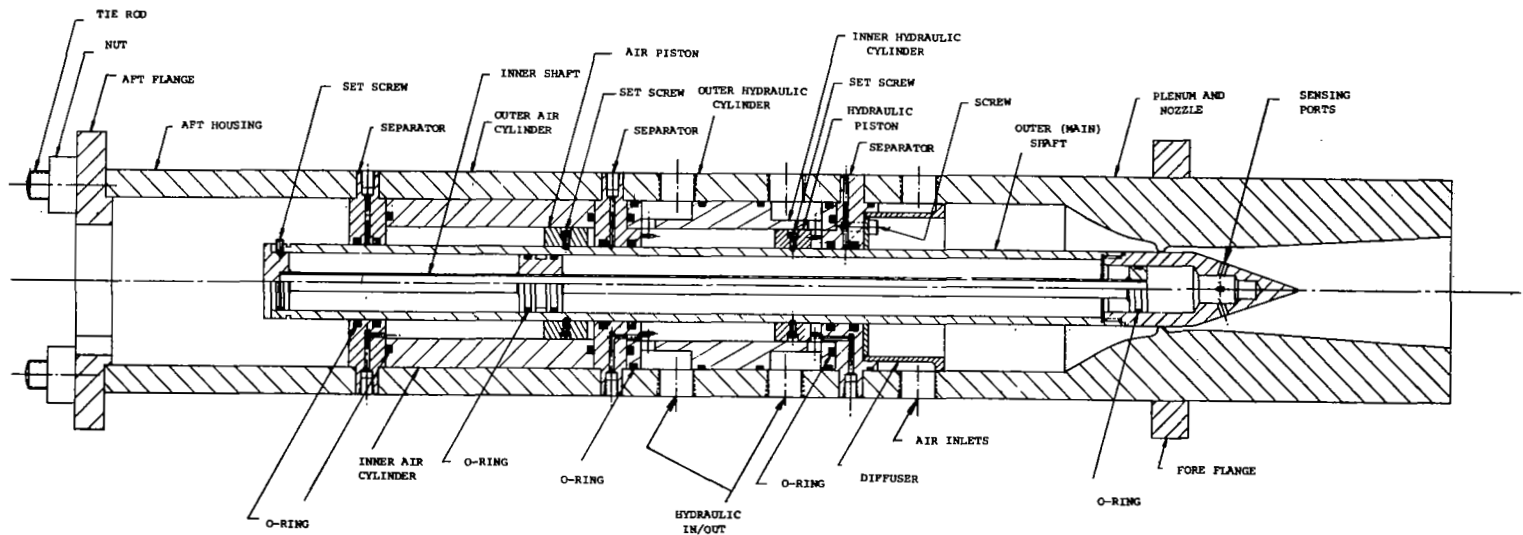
SCALED DRAWING OF PLUG VALVE (1/4" = 1")
